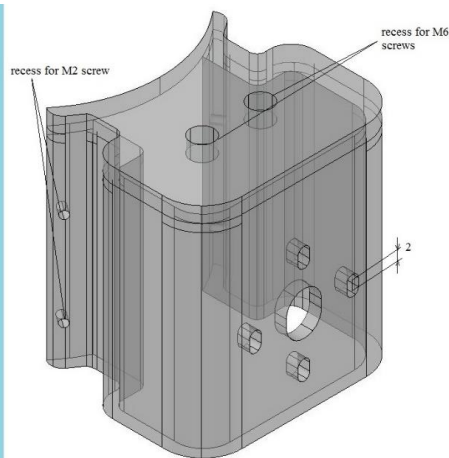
X-Ray view of motor-spur gearbox mount in a different perspective
